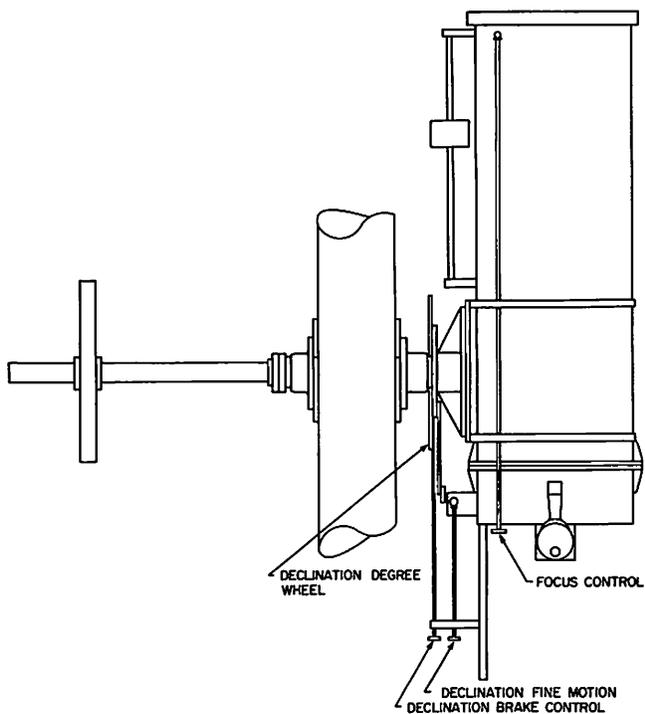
Design drawing of 21-inch telescope by W. L. Richards Co. of Austin, Texas, manufacturers of this instrument.
